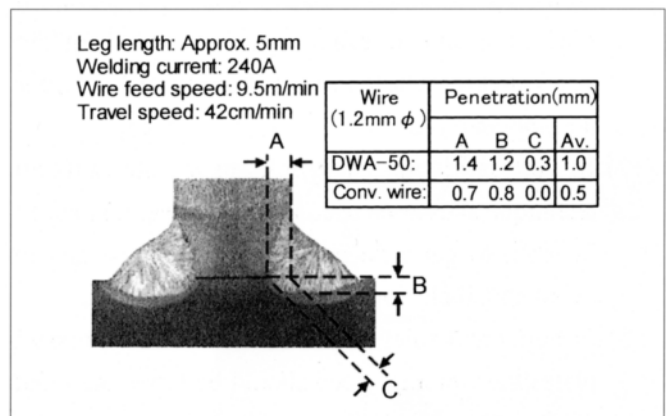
Penetration test results of DWA-50 in horizontal fillet welding with 80%Ar+20%CO₂ gas shielding
